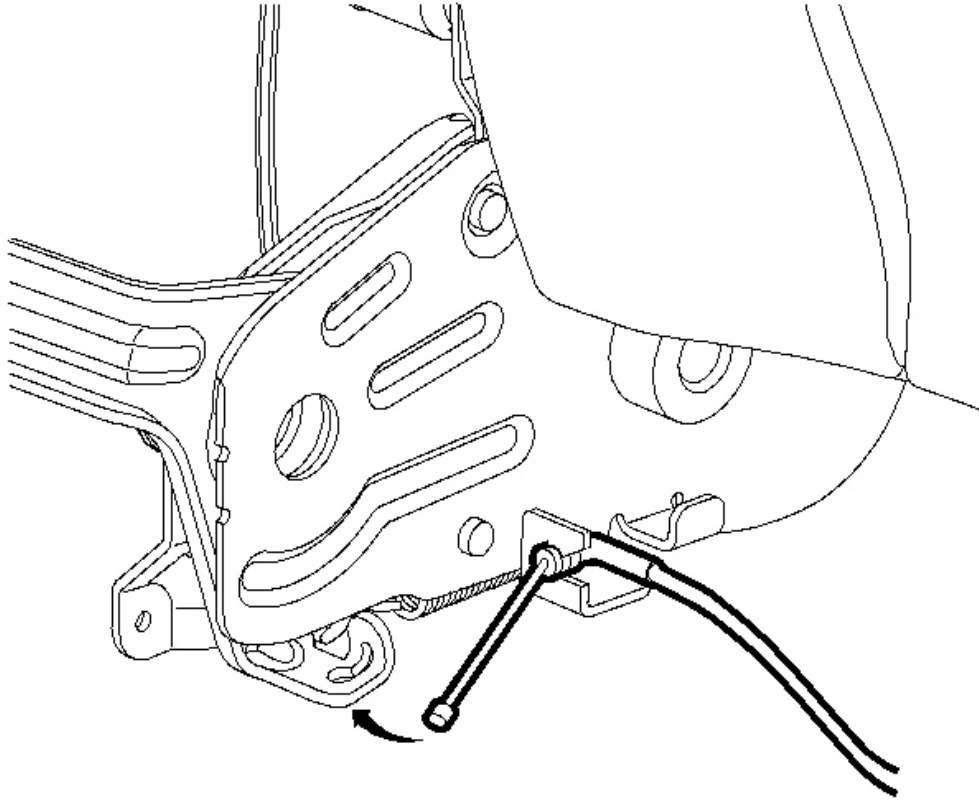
Disconnecting/Connecting Outboard End Of The Fold-Flat Cable
